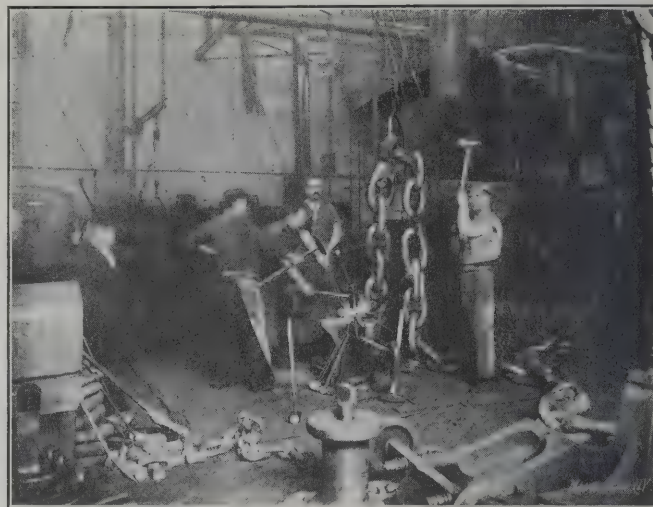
The Chain Gang at Work Welding a Link
